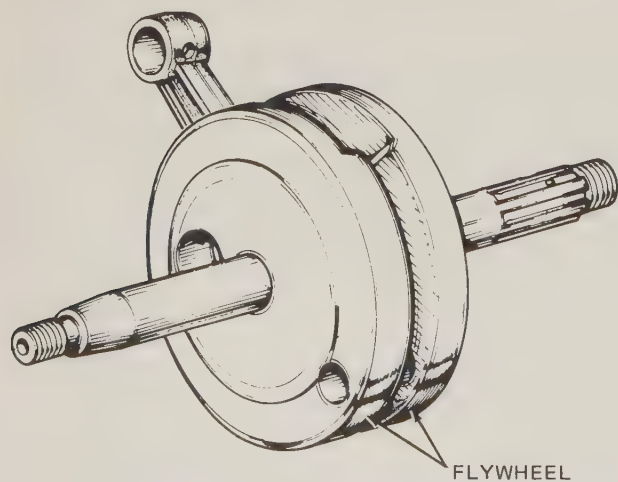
An assembled built-up crankshaft for a single-cylinder four-cycle engine. (Honda Motor Company, Ltd.)
